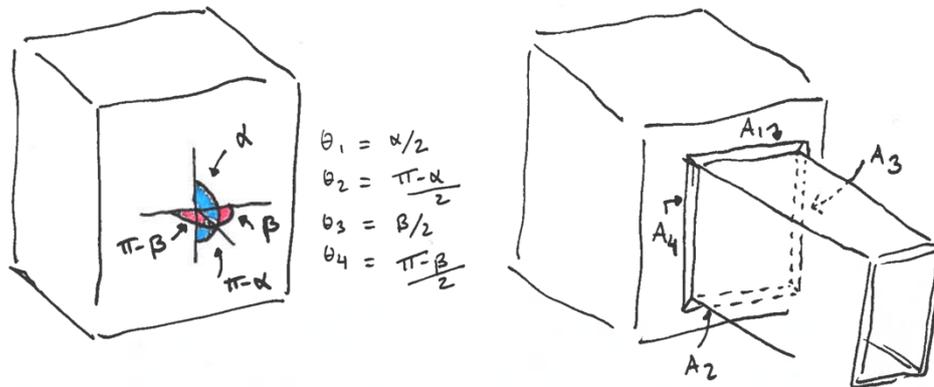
Angle to consider for each side of the fillet weld
